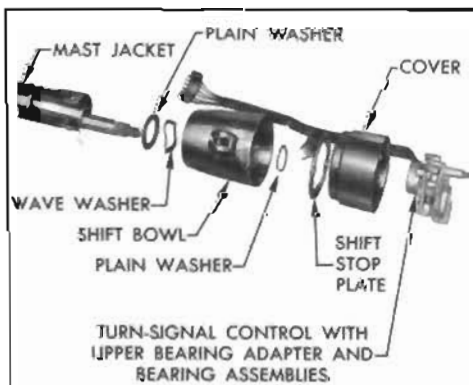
Disassembly of Upper Portion of Automatic Transmission Mast Jacket
